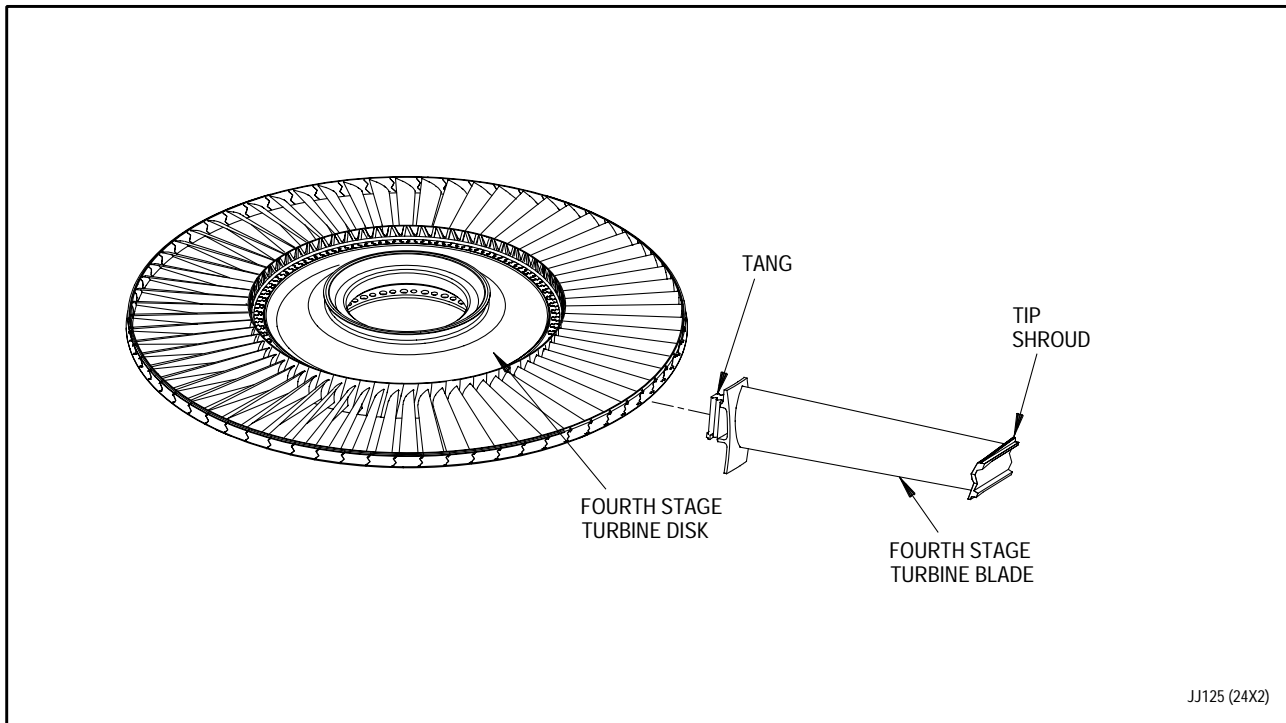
Fourth Stage Turbine Disk and Blades - Assembly
